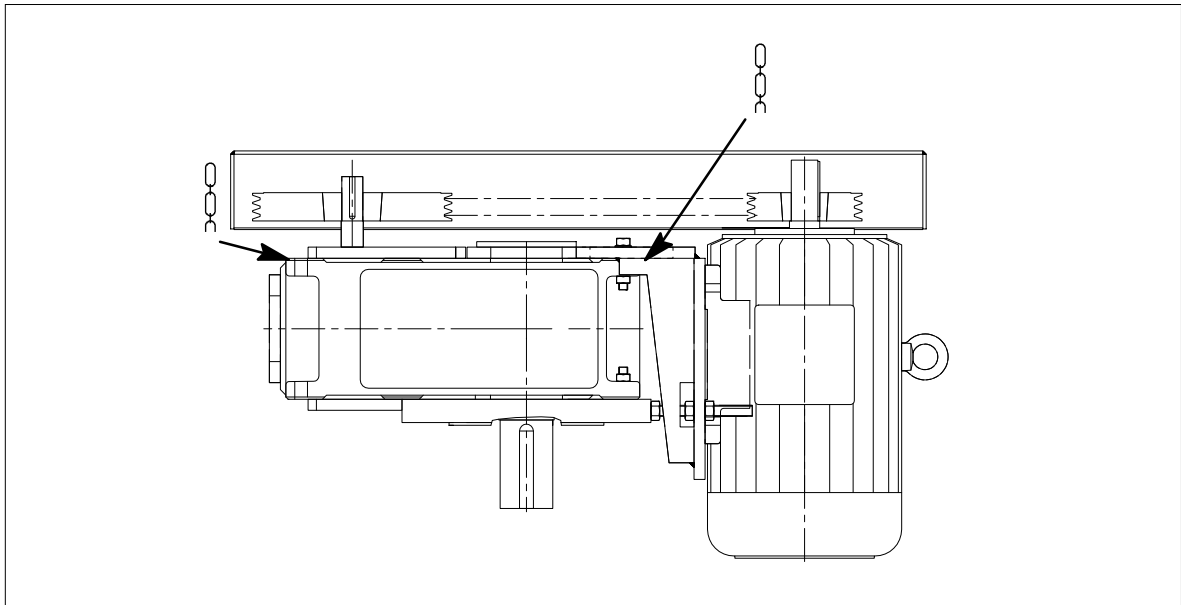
Attachment points on gear units types H..V with motor bedplate
